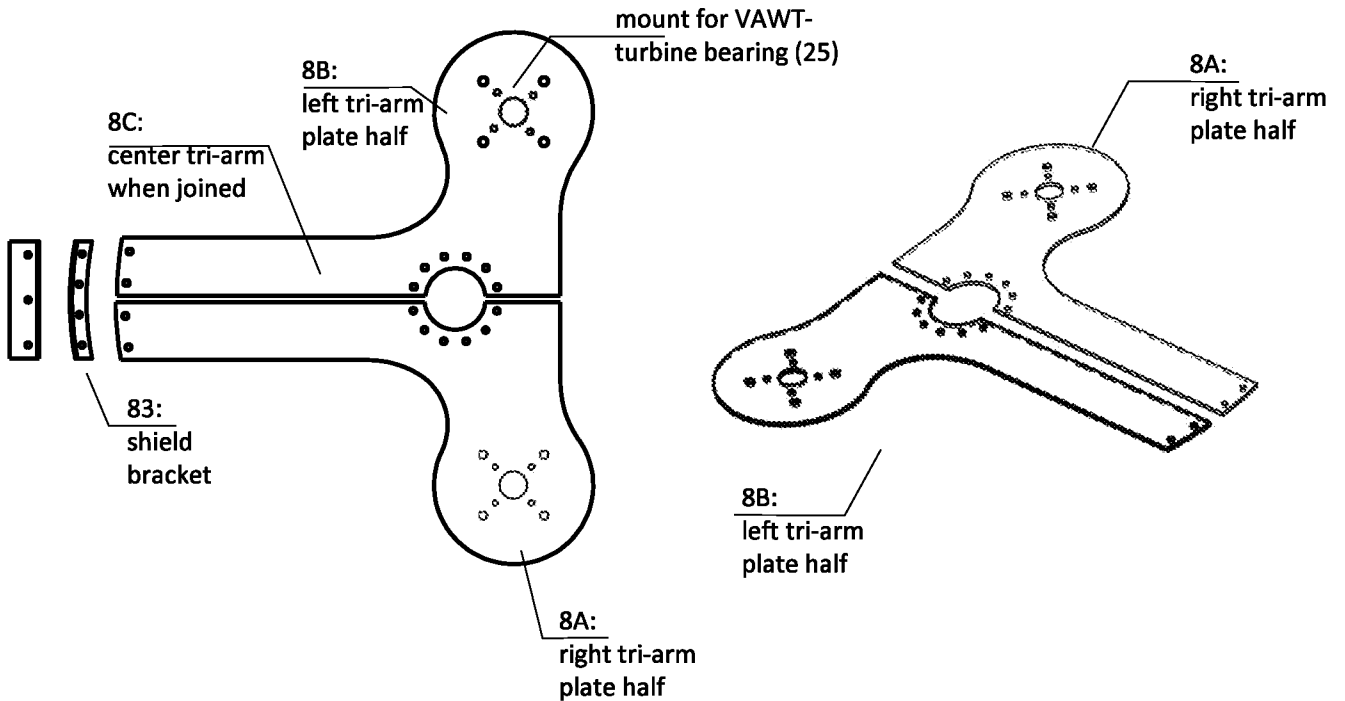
D: upper and lower tri-arms plane view with shield bracket, and isometric view, before assembly
